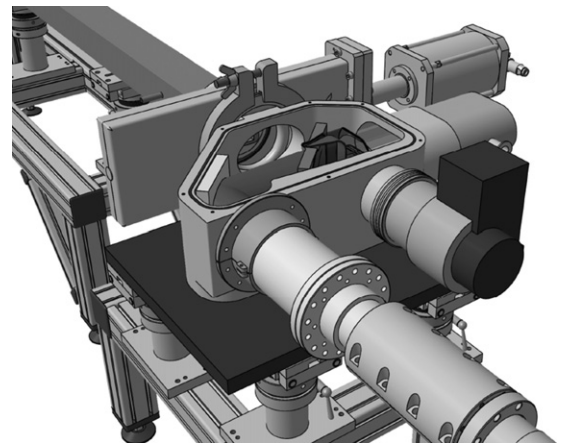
This picture of the steering mechanism shows the most vulnerable parts of the ECRH system. The mode converter in yellow connected to the steering mechanism housing, and behind the housing the isolation valve which is connected to the ex-vessel square waveguide. These components are placed outside the port plug, for easy maintenance.
